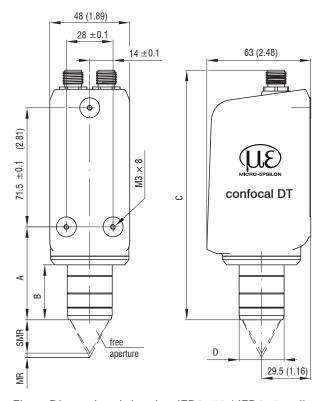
Dimensional drawing IFD2410 / IFD2415, dimensions in mm
